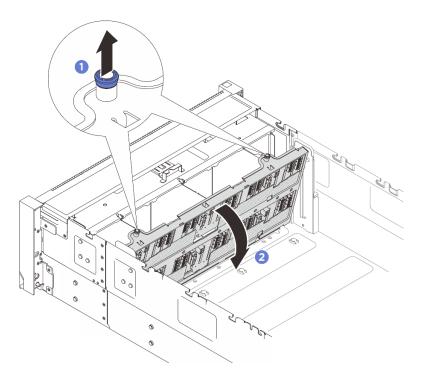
Removing drive backplane carrier assembly (2.5-inch bay chassis)
